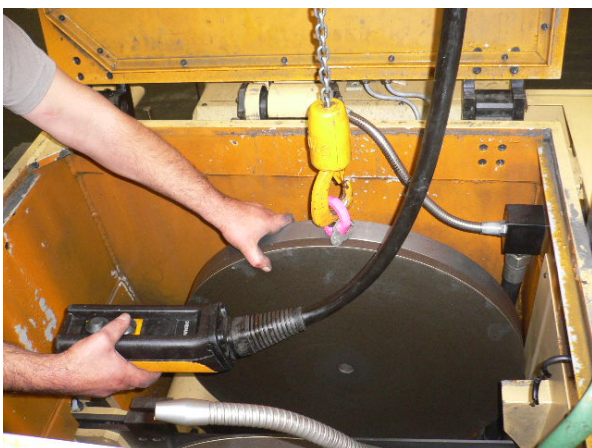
Penetration of the cutting fluid by the 30 mm hole in the center of the abrasive disc.
